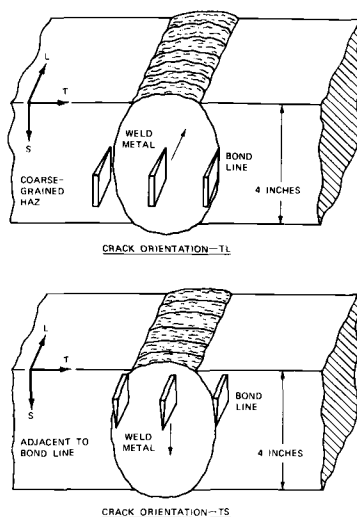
Orientations and locations of the fatigue crack in a 4-in.-thick (102-mm) weldment.
